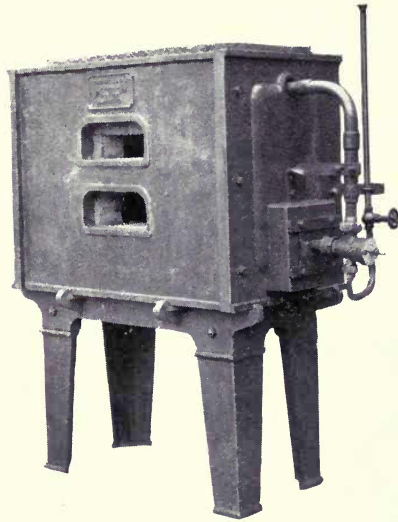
CHURCHILL RIVET HEATING FURNACE.
